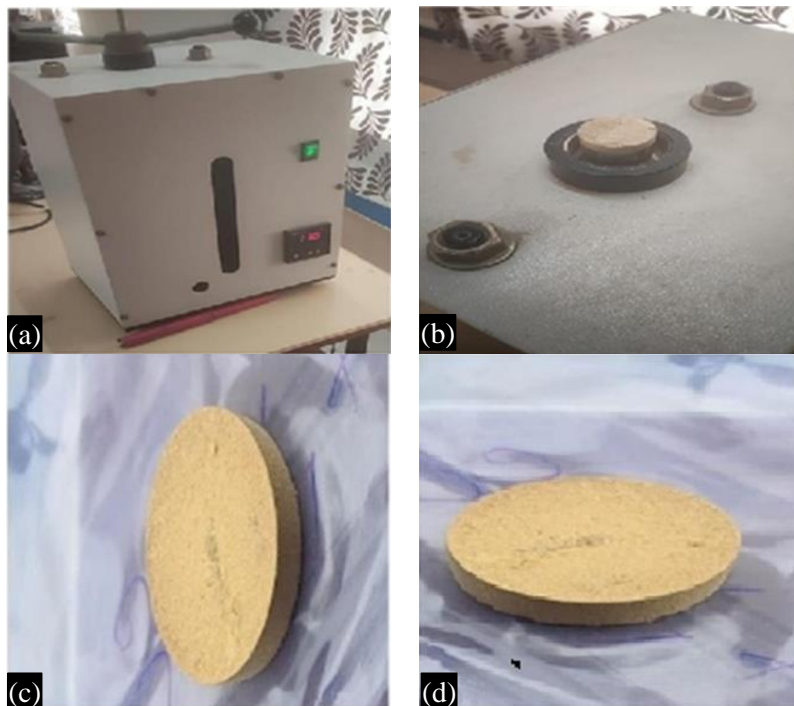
(a) Cold Mould Machine (b) Cylindrical Mould (c) Hardness Test Specimens (d) Hardness Test Specimens.
